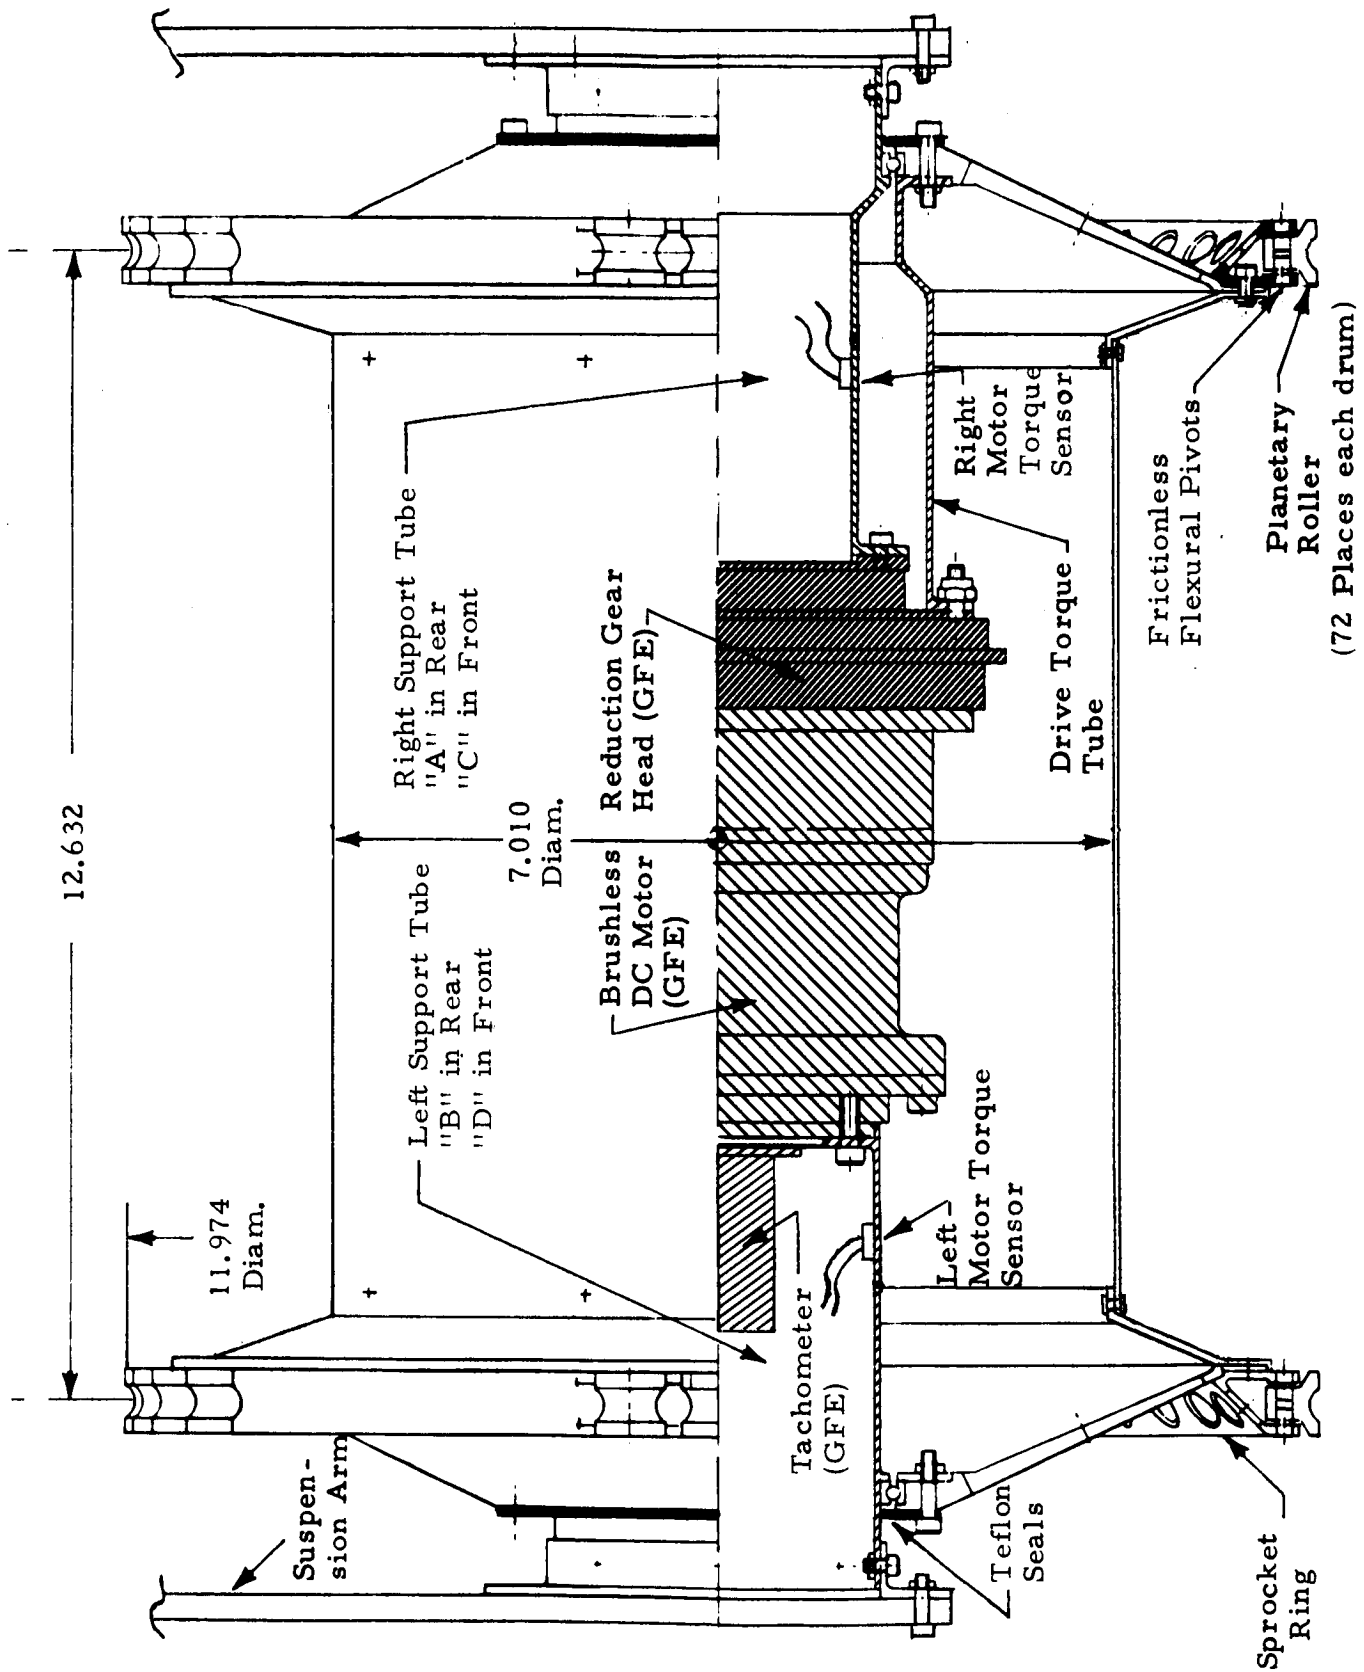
Layout of Drive Motor Installation and Drive Torque Sensor Locations
